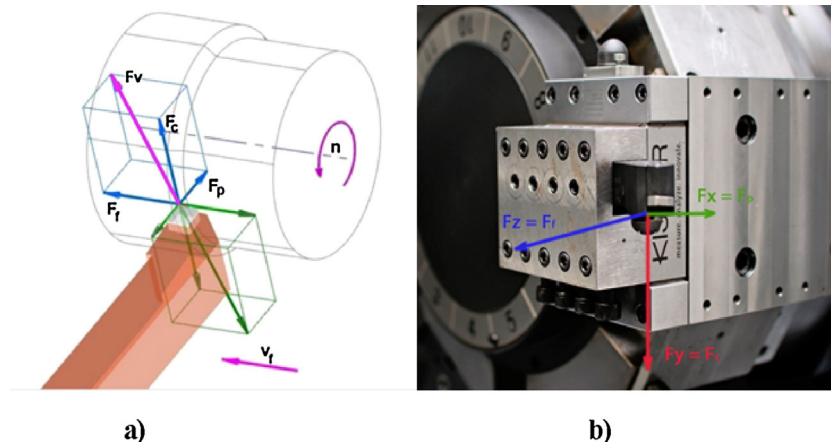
(a) Cutting forces components during turning. (b) Three-component piezoelectric dynamometer in a plant lathe DMG MORI NLX 2500 MC/700 and component force measurement system.
